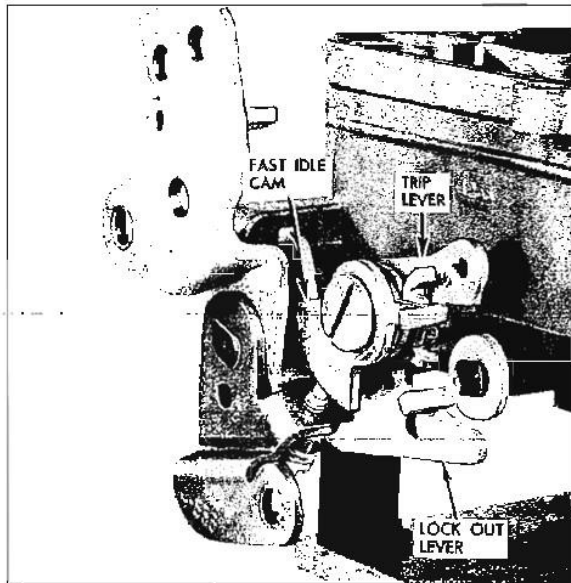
B-82 Location of Fast Idle Cam and Lockout Lever
